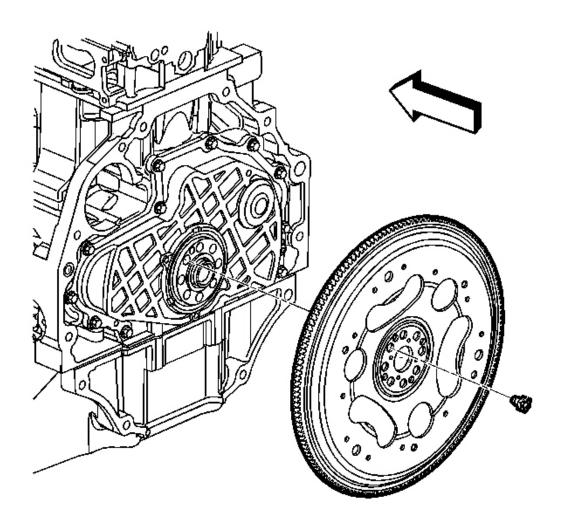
Installing Flywheel - Automatic Transmission Courtesy of GENERAL MOTORS CORP.
